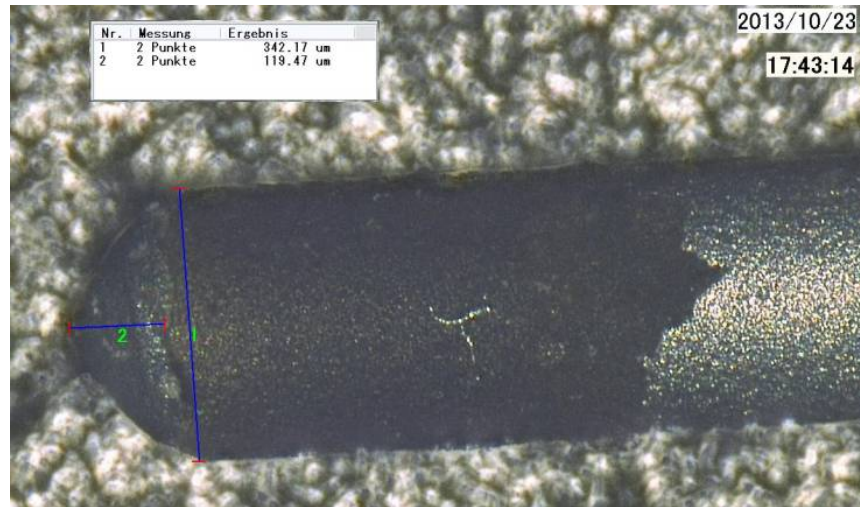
A case of extreme tool-electrode wear when machining at 12V
